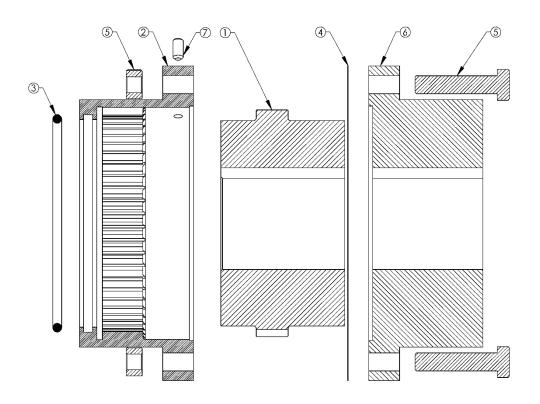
STEEL GEAR SINGLE FLEX COUPLING (EXPLODED VIEW)
